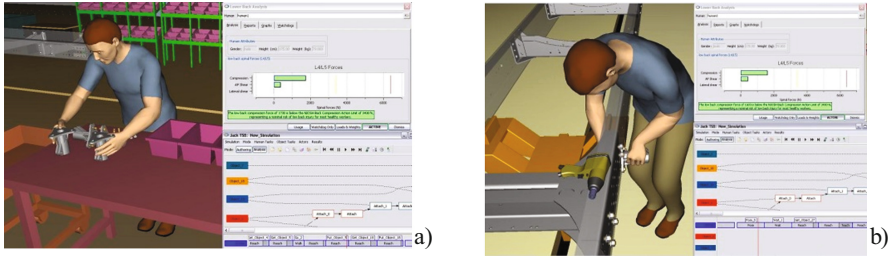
Analysis of the back injuries in the state (a) «preparation of rear wing holders»; (b) «mounting the rear wing holders to the frame»
